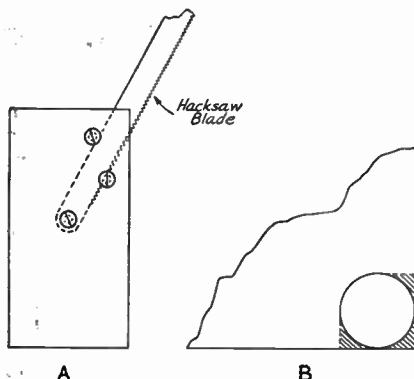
Cutting rectangular holes in a chassis. If the corner holes are filed out as shown in the shaded portion of B, it will be possible to start the hacksaw blade along the cutting line. A shows a single-ended handle for a hacksaw blade.
